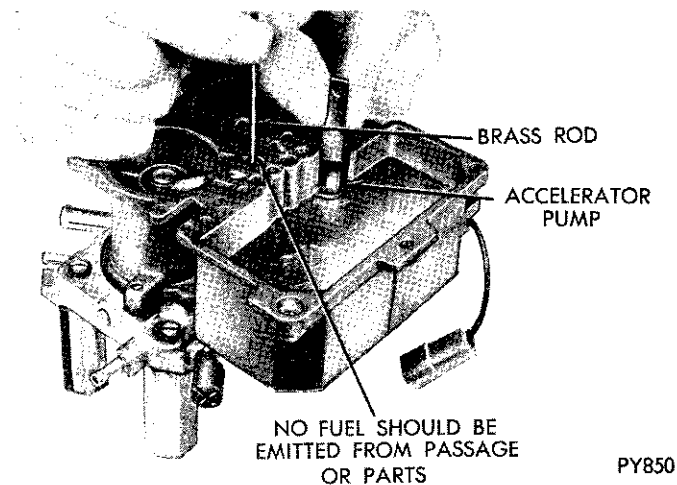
Testing Accelerator Pump Discharge Check Needle
